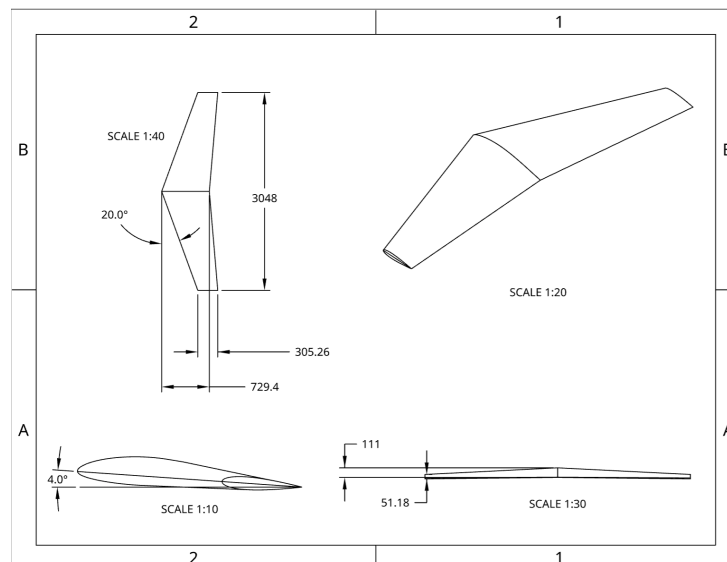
Dimensioned OnShape Drawing with an isometric, side, front, and top views
